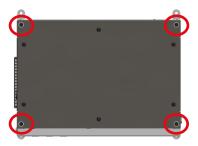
Attaching points for M8 lifting eyebolts, top panel view
